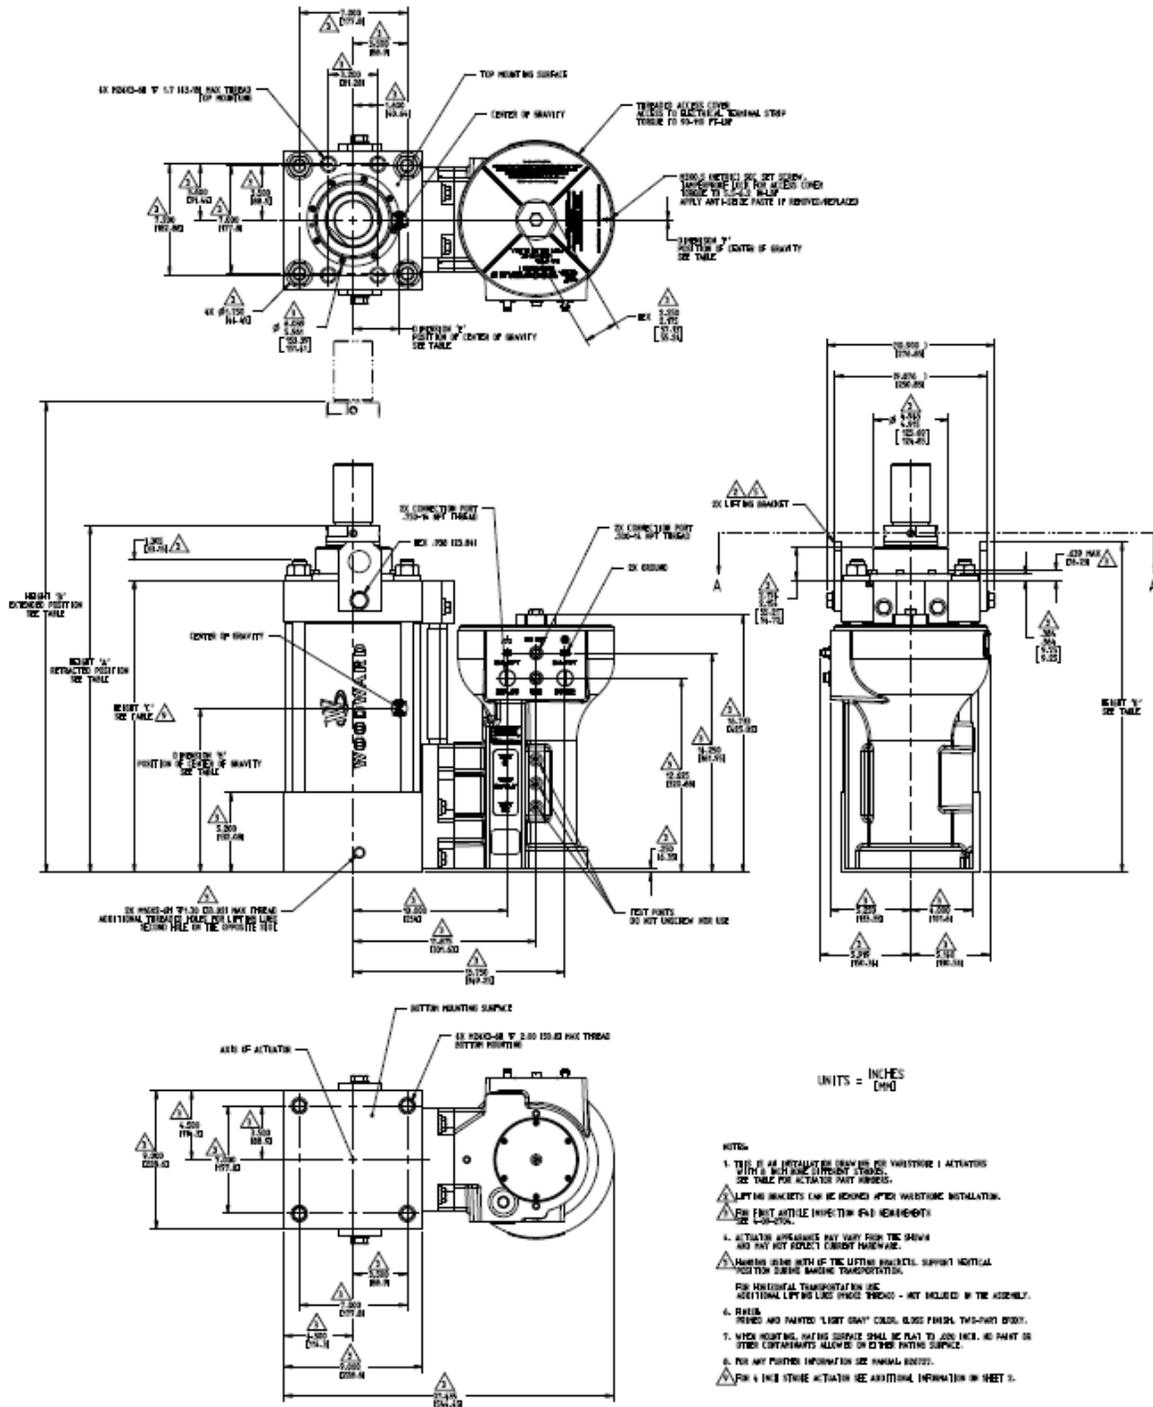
V45TD-20XX Integrated Installation Dimensions
